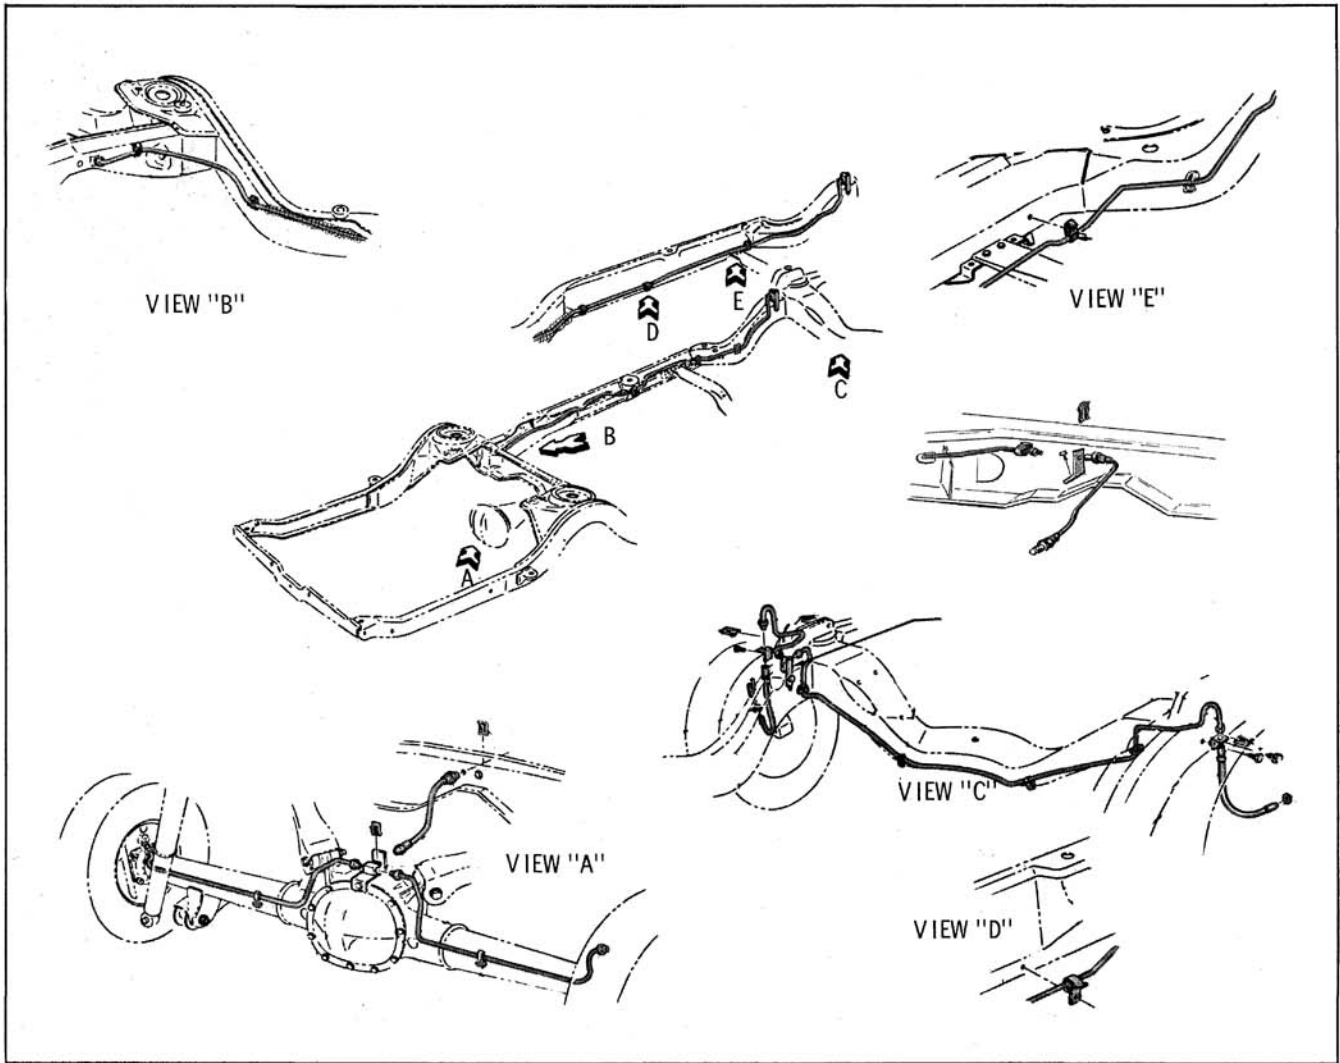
Hydraulic Brake Lines (33 through 38 Series)
